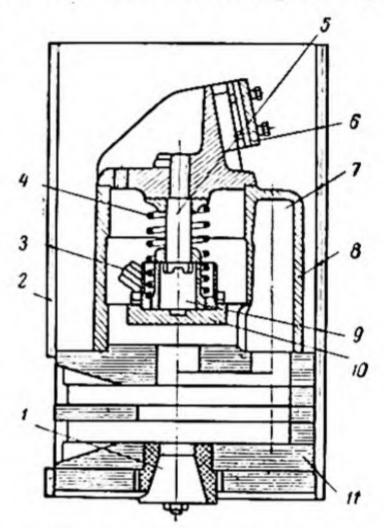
Arc-control chamber: 1—throat; 2—barrier; 3—flexible con-nection; 4—spring; 5—guide bolt; 6— holder; 7—buffer space; 8—housing; 9-sleeve; 10-replaceable tip of stationary contact; 11-pack plates
